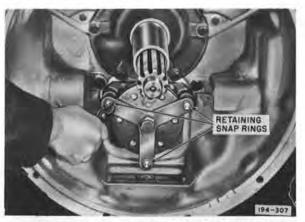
Removing Clutch Brake Pressure Plate Retaining Snap Rings
